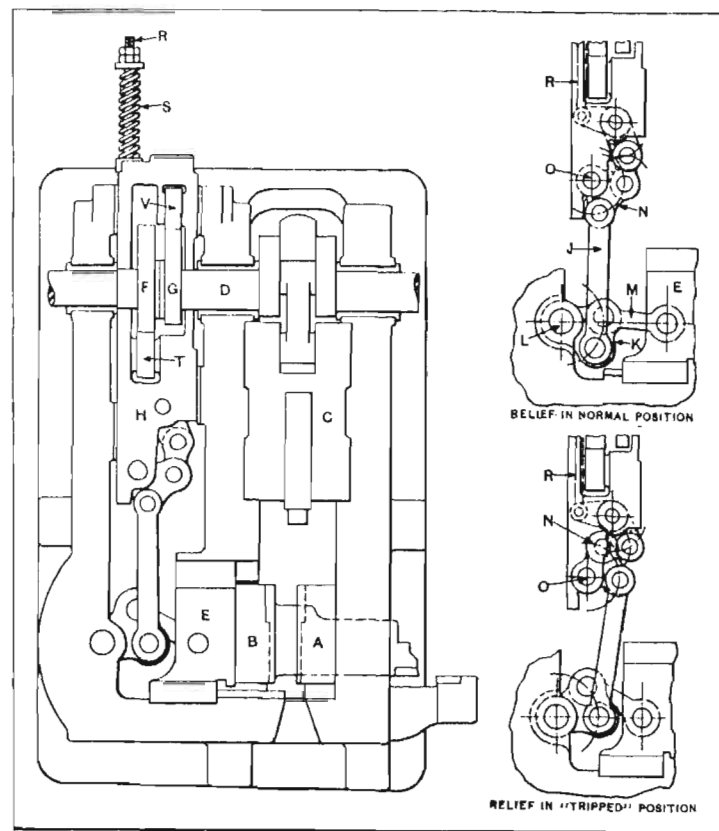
Plan and Detail Views of Forging Machine Showing Automatic Relief or Tripping Mechanism
